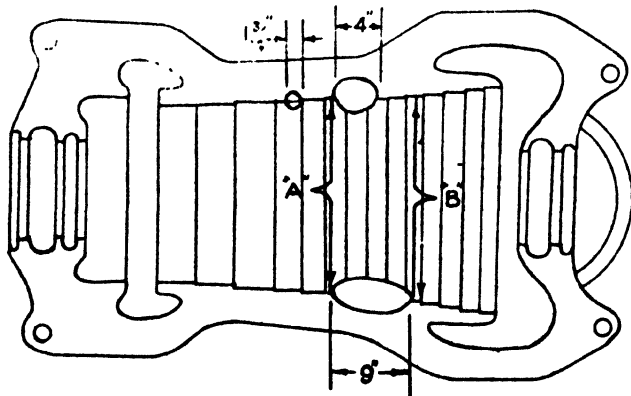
Distortion due to welding. Before welding, "A" 21.986-inches, "B" 23.003-inches. After welding "A" 21.997-inches, "B" 23.020-inches. After annealing "A" 21.989-inches, "B" 23.015-inches. Welding caused a concave deformation at the horizontal joint of .007-inch.
